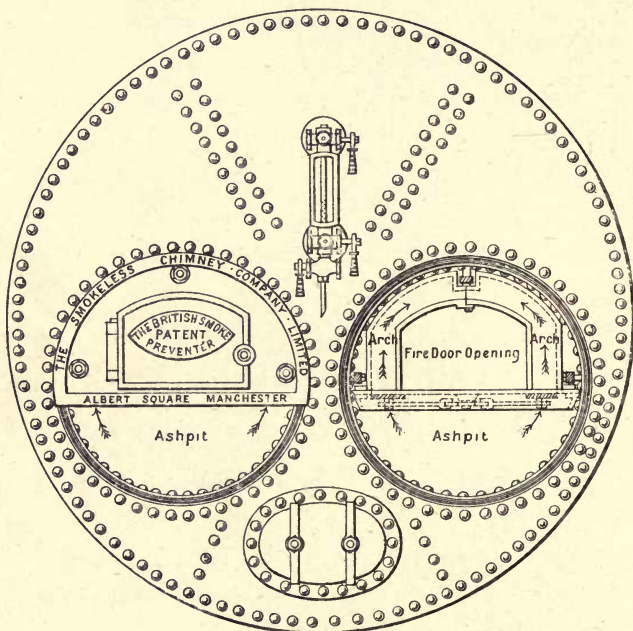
British Smoke Preventer, showing furnace front in position with door closed and furnace front removed.
